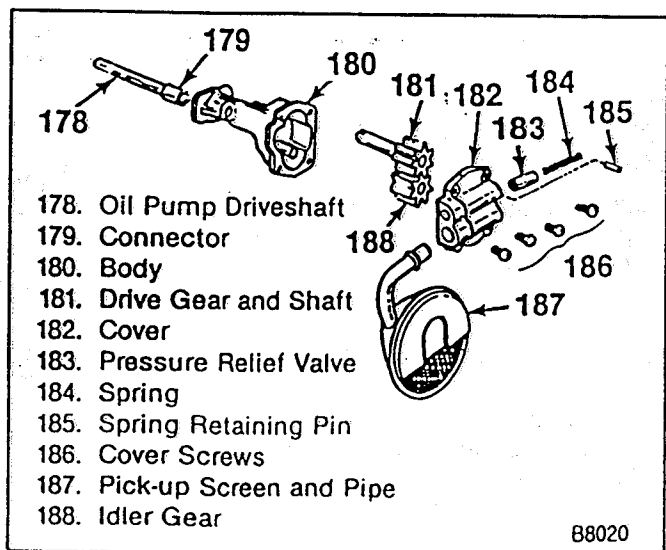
Oil Pump Components (5.0L and 5.7L Engines)
